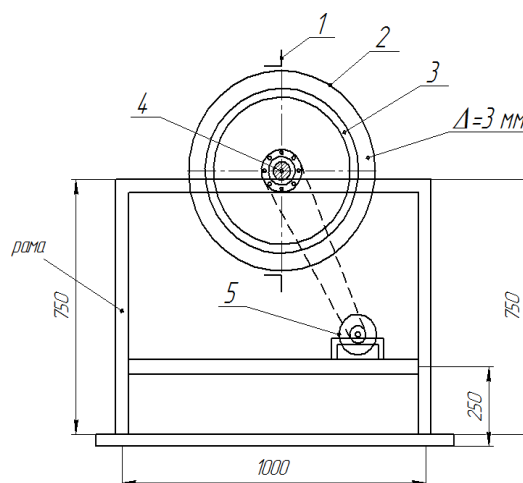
Layout scheme of the spiral drum: 1–corners; 2-drum; 3-spring; 4-pulley; 5 – electric motor.
